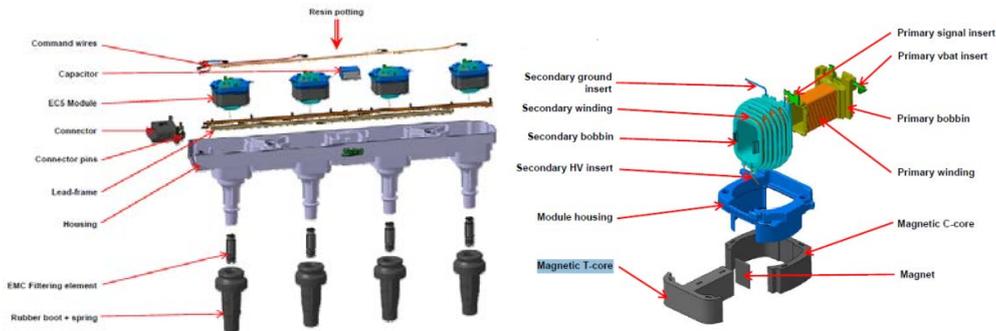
rail ignition coil exploded chart Fig4: coil module exploded chart
